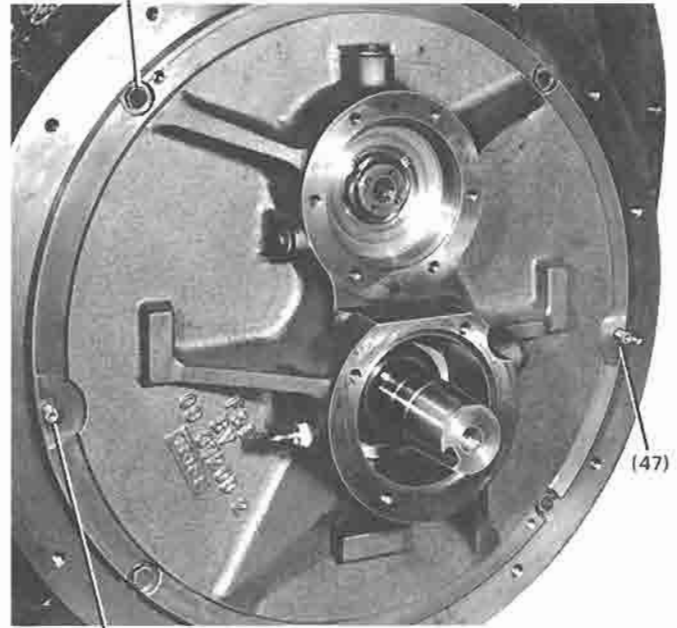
INSTALLING "O" RING ON BEARING ROTOR SUPPORT
